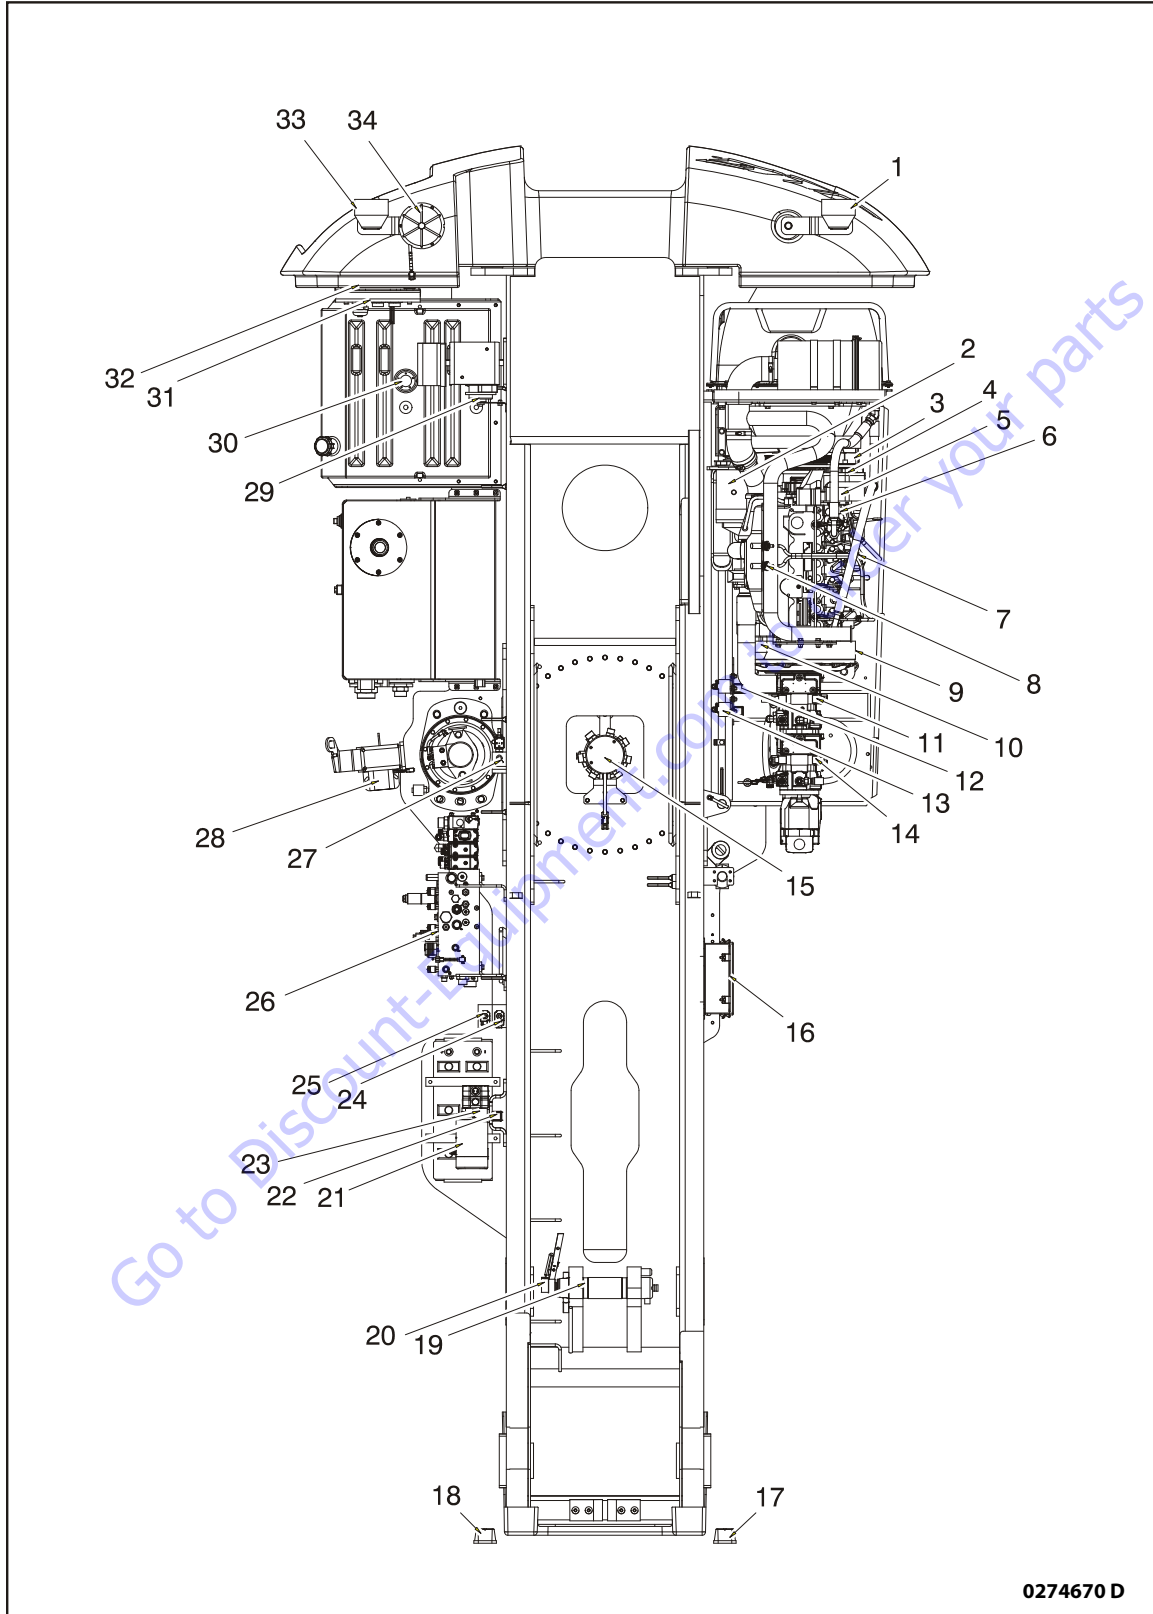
Chassis Component Location - Sheet 1 of 2
